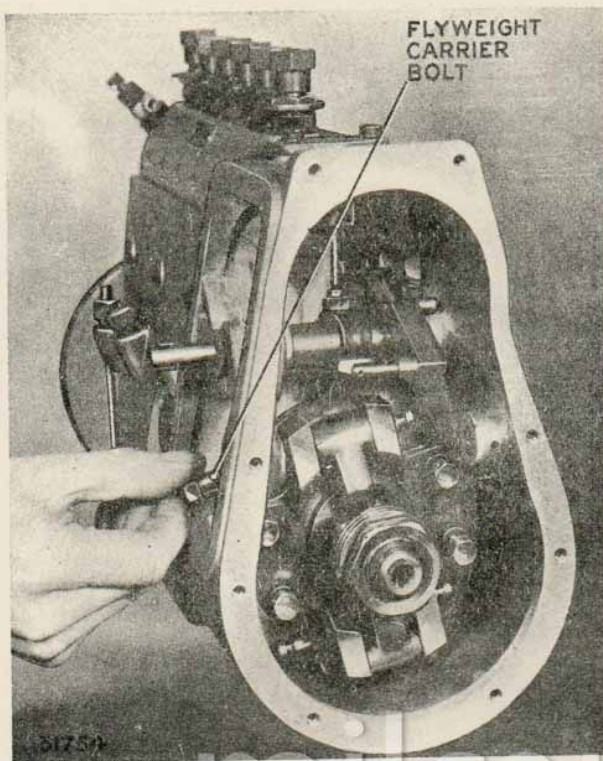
REMOVING FLYWEIGHT CARRIER.
